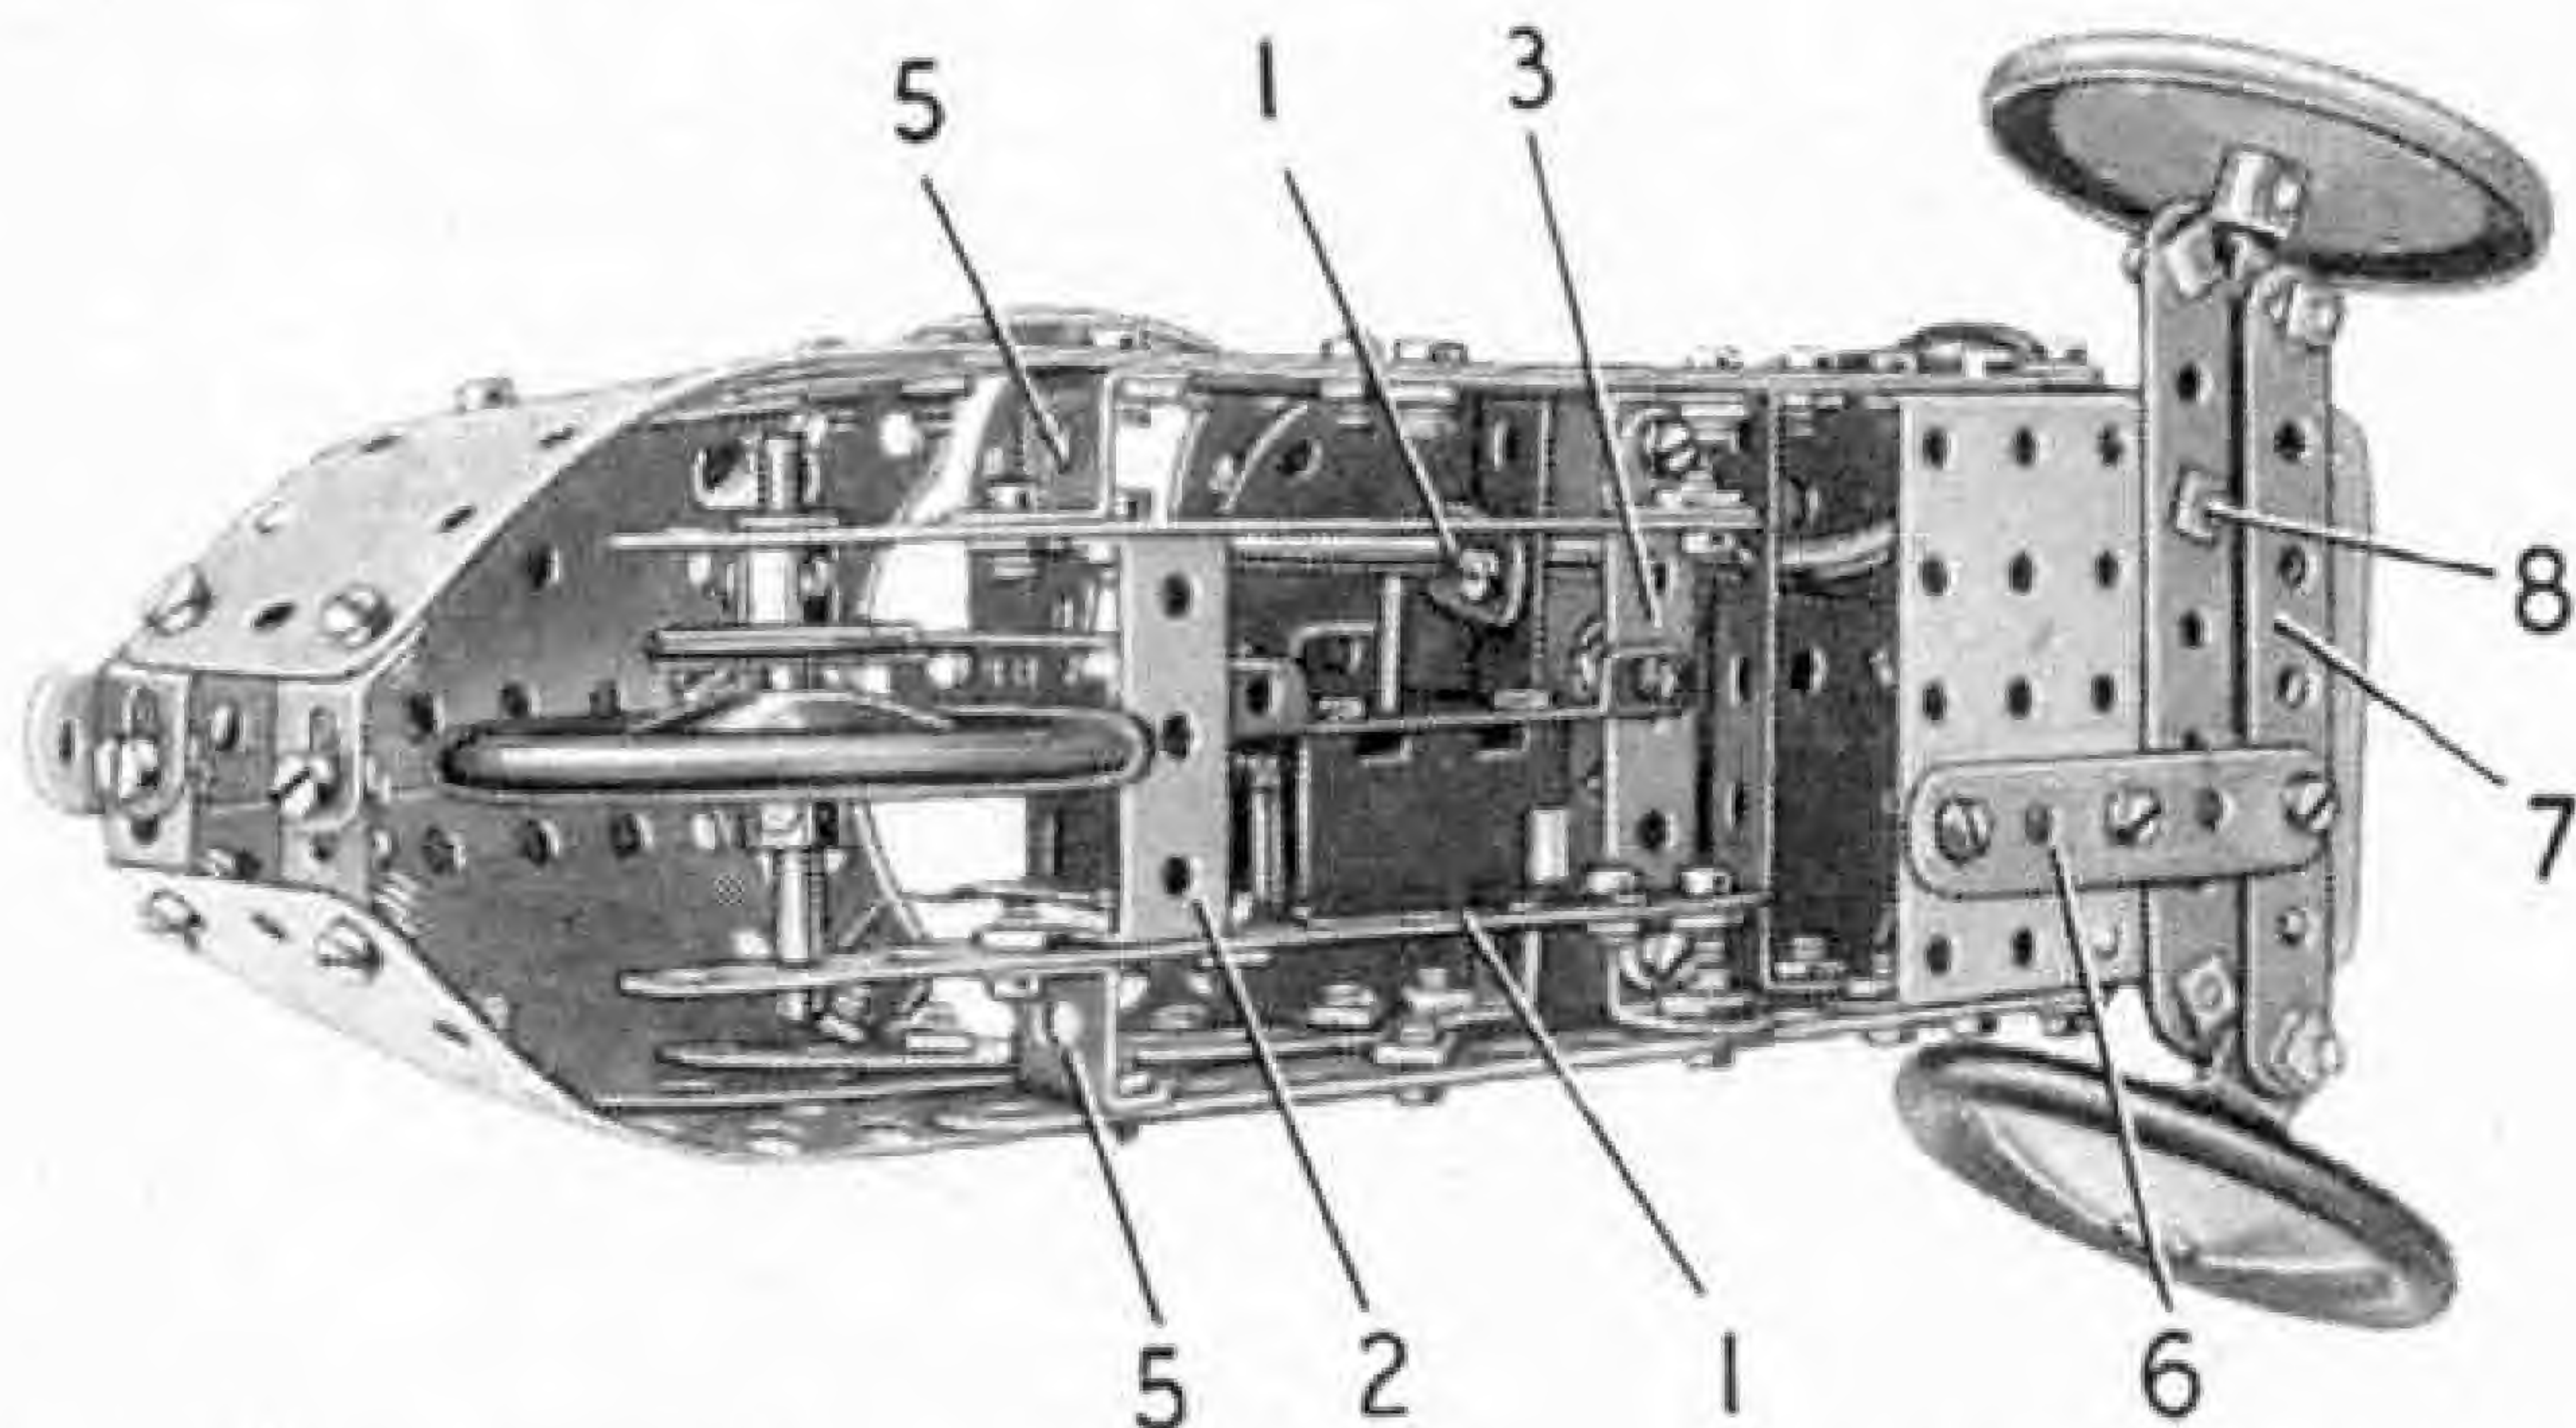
An underneath view of the car that shows how the Motor is fitted, and the steering mechanism.
